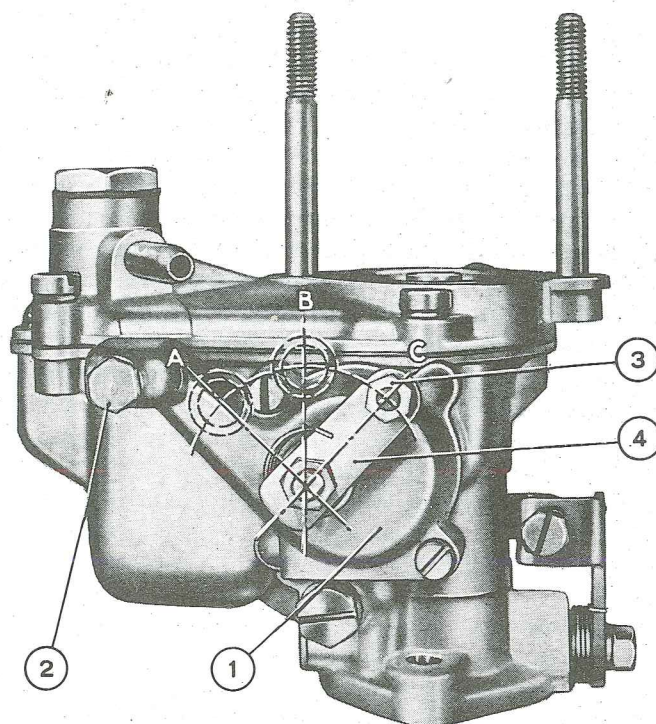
Weber 26 IMB 1 carburetor, starting device (choke) end.
